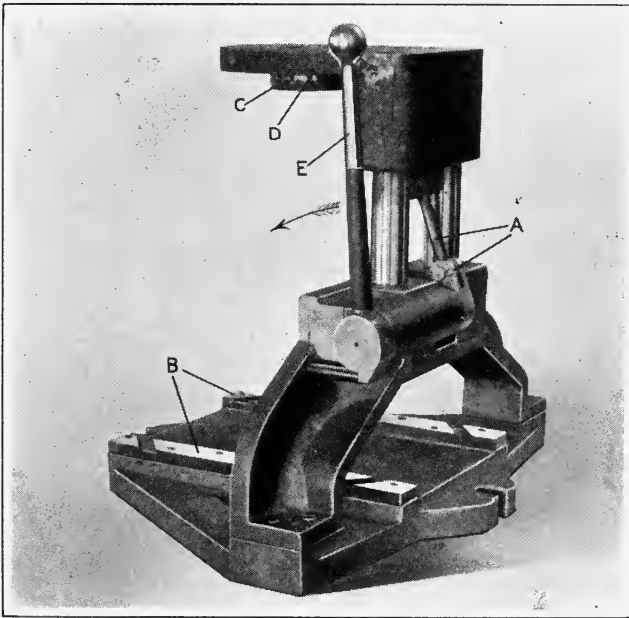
Drill Jig used for drilling Seven Small Holes in Transmission Case at One Time
